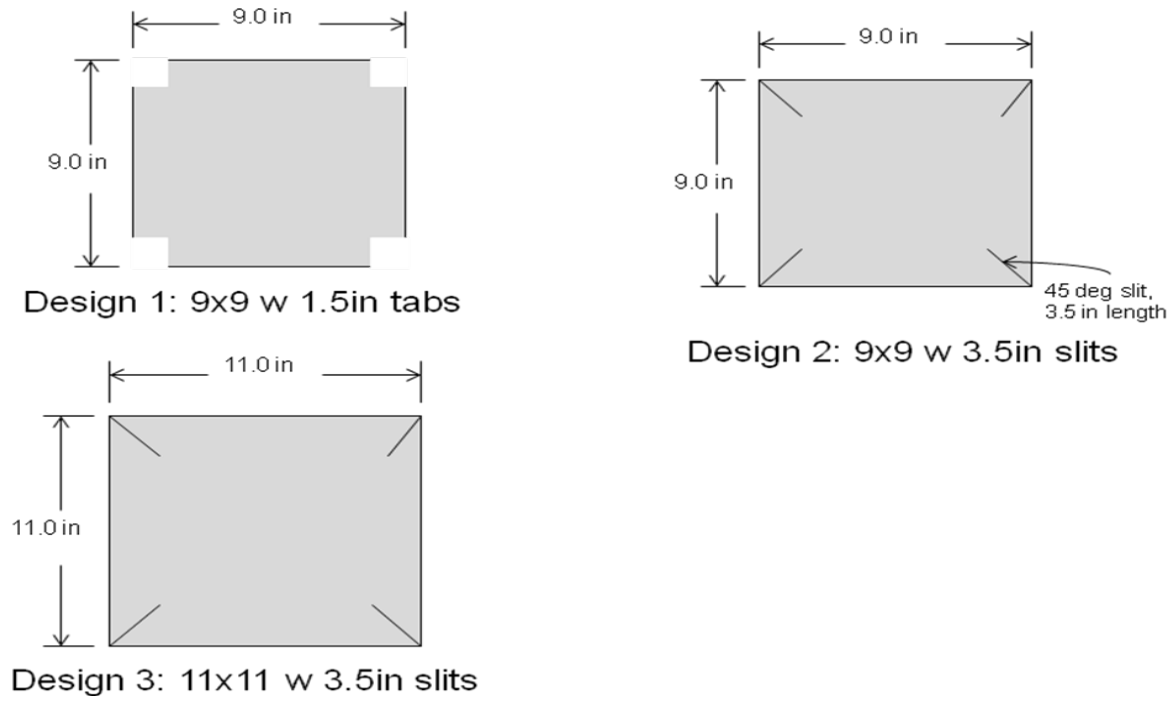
Initial designs of 3 different coupon dimensions and shapes
